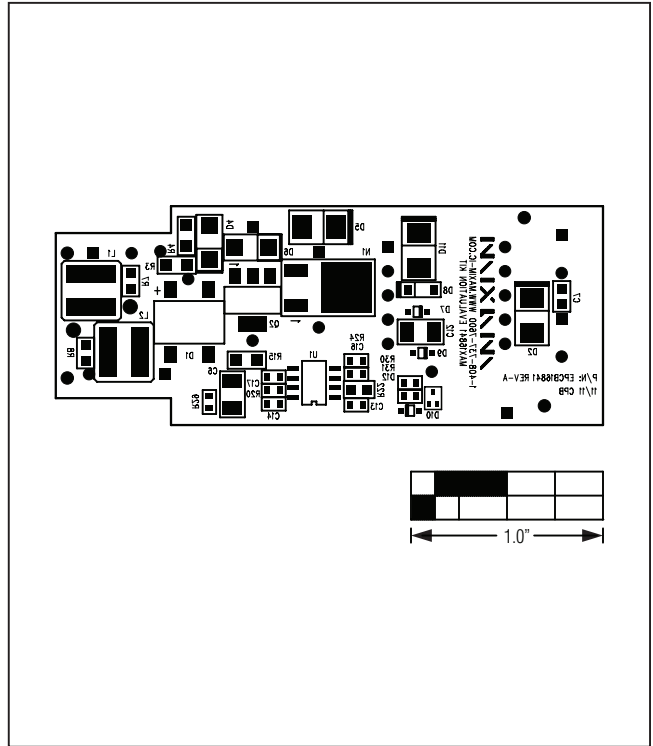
MAX16841 EV Kit Component Placement Guide—Solder Side
